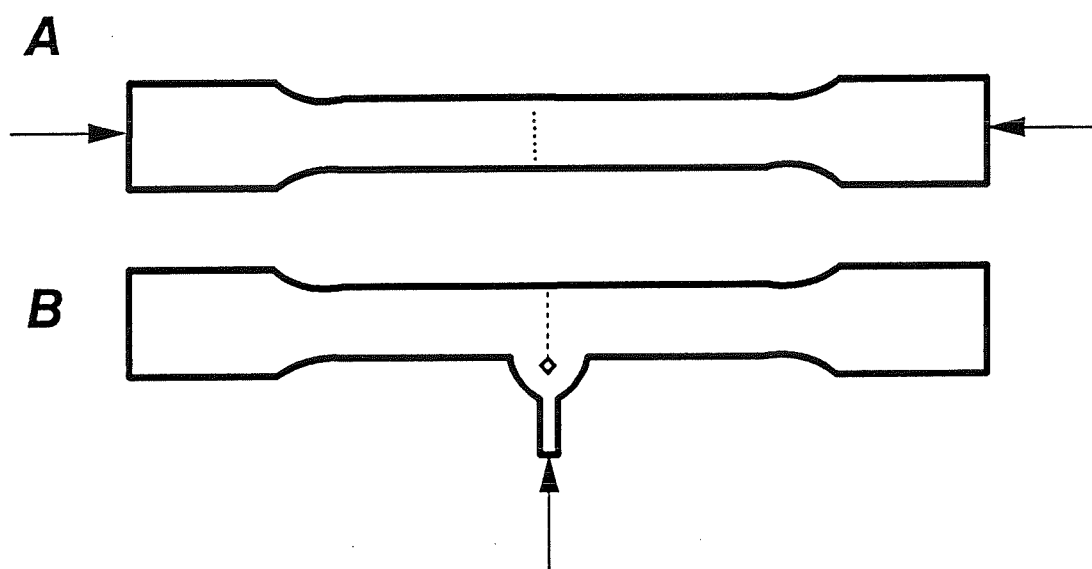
Standard test mold cavity (ASTM-D647)¹⁷³. A- "cold weld", B- "hot weld"
